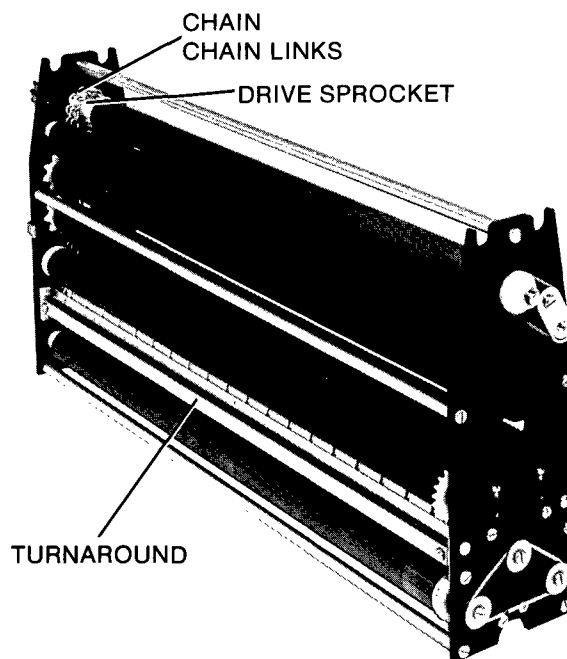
DEVELOPER RACK ASSEMBLY
